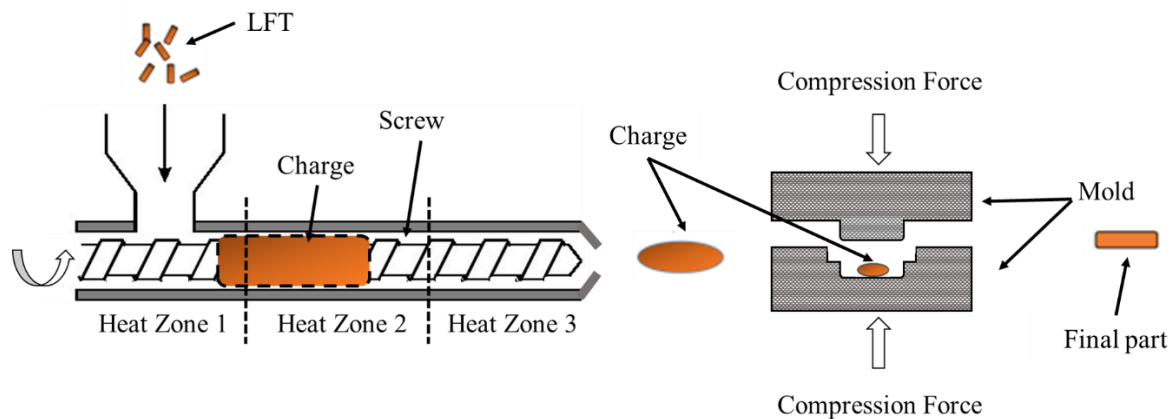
Schematic of the extrusion compression molding process for LFT composites. G-LFT are melted and conveyed through a screw extruder to form a charge, which is then transferred into a mold cavity and compressed into the final part shape.
